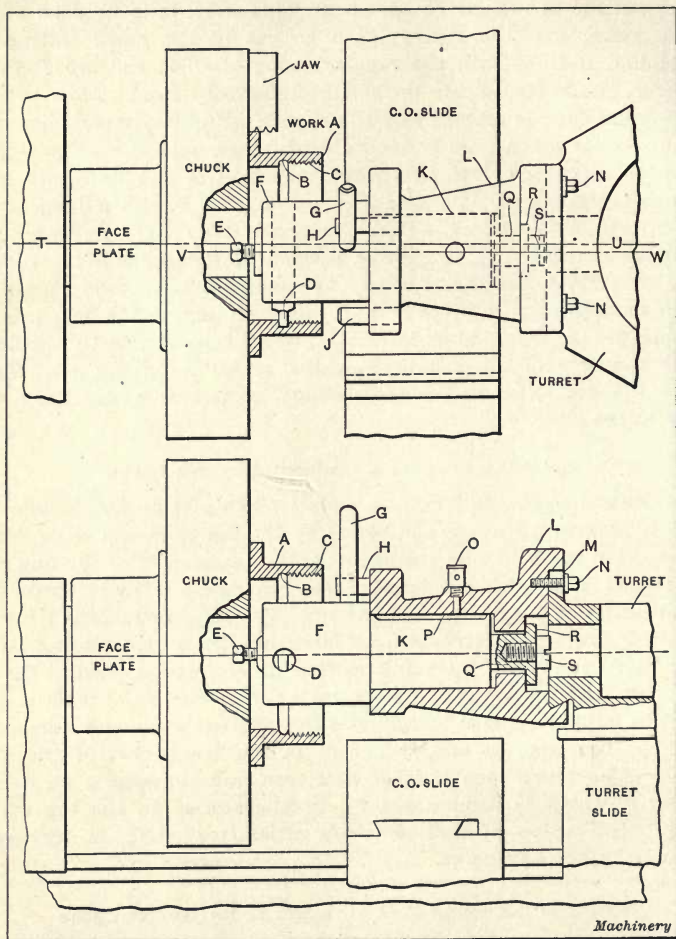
An Eccentric Recessing Tool for the Turret Lathe
